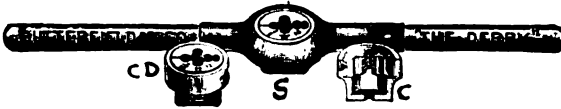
Methods of cutting male threads are with a die and stock, or on a lathe. When a die and stock is used, it is placed in a collet (C) and the collet and die (CD) are then placed in a stock (S). This is worked over the part to be threaded. The illustration shows a die and stock for cutting threads on machine screws.
